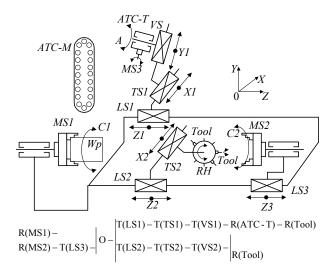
Lathe with two main coaxial symmetrical spindles.
